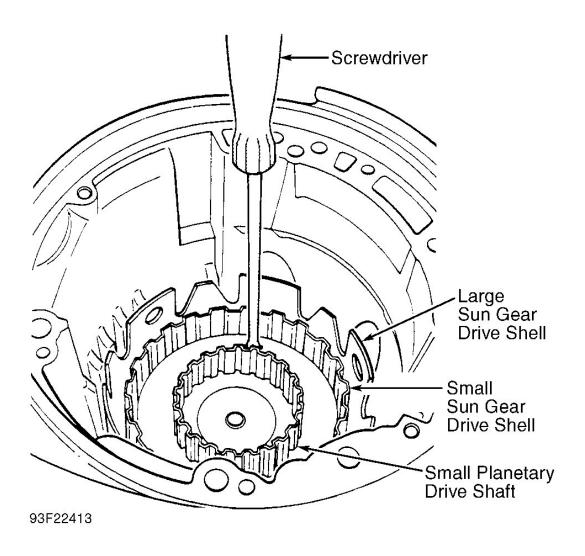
Holding Small Sun Gear Drive Shell Courtesy of VOLKSWAGEN UNITED STATES, INC.
